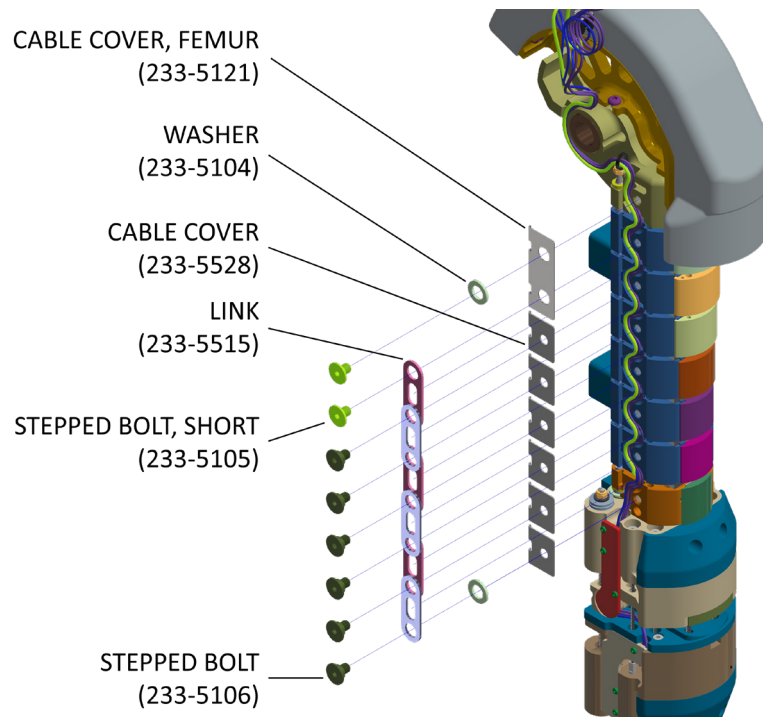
Remove the Stepped Bolts, Links, Washers, and Cable Covers
